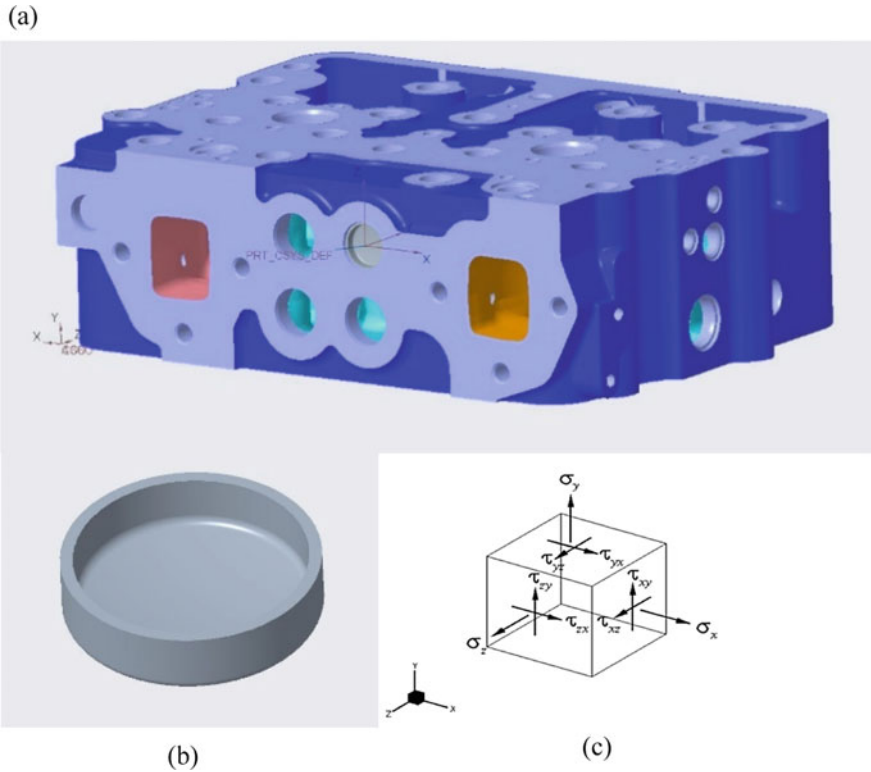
a Actual cylinder head and cup plug assembly. b Simple cup plug. c Stresses acting on an element of the mating surface
